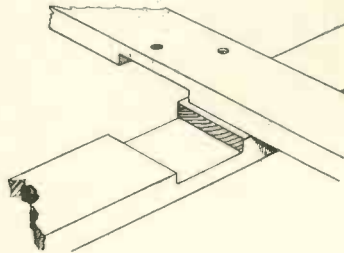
HALVED JOINT FOR STAR FRAME.
